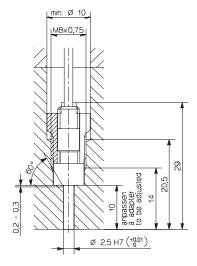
Mounting Type 6194B... with mounting nut Type 6457
